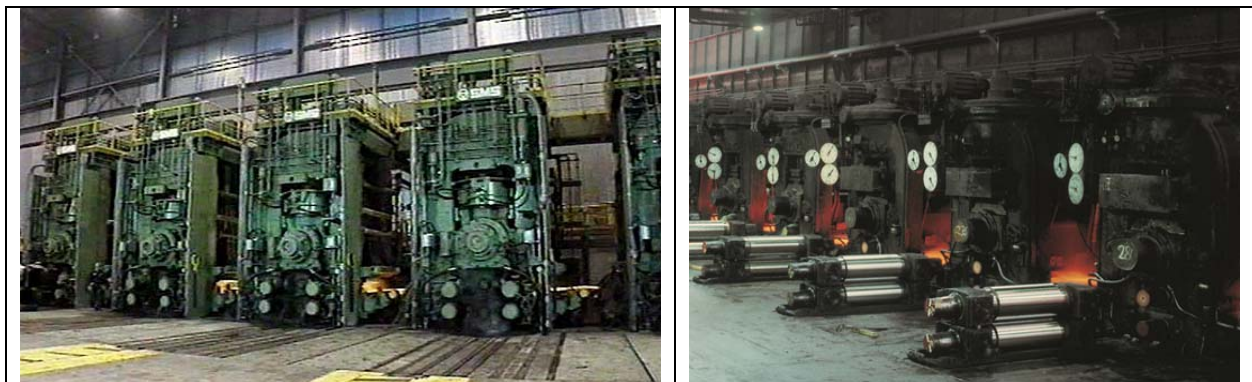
modern tandem steel mill (left) and a further example of a hot strip mill (right).
